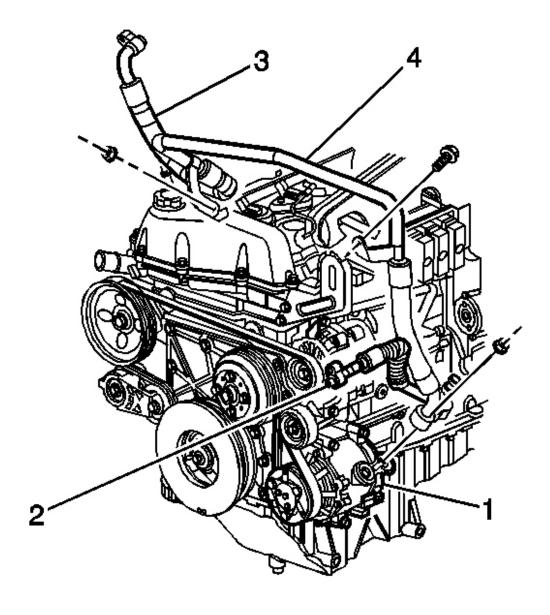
Removing/Installing A/C Refrigerant Pressure Sensor Courtesy of GENERAL MOTORS CORP.
